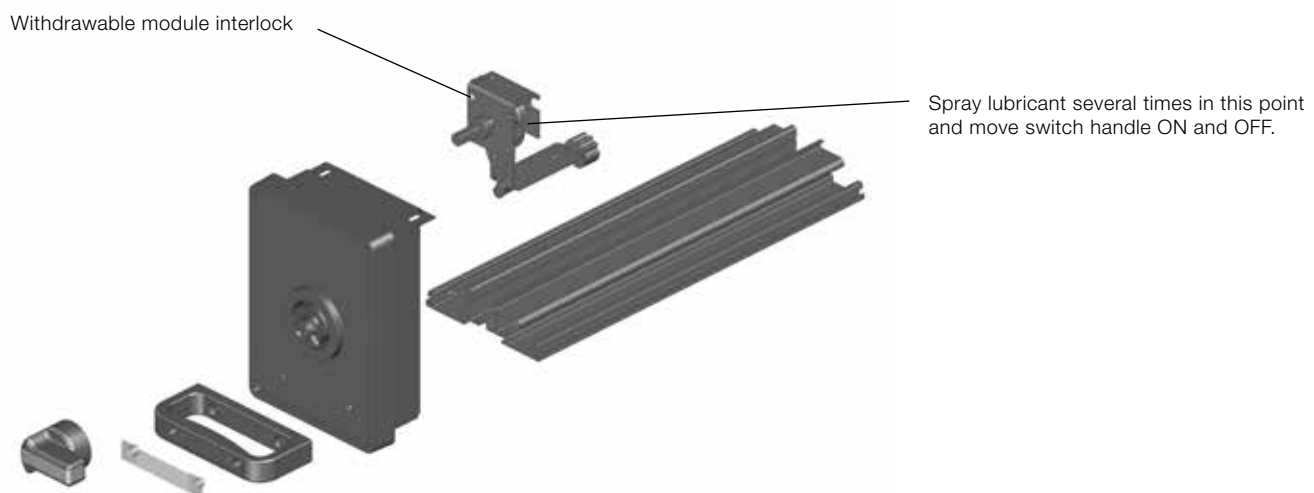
Lubrication of MNS 8E/4 and 8E/2 withdrawable module interlocks
